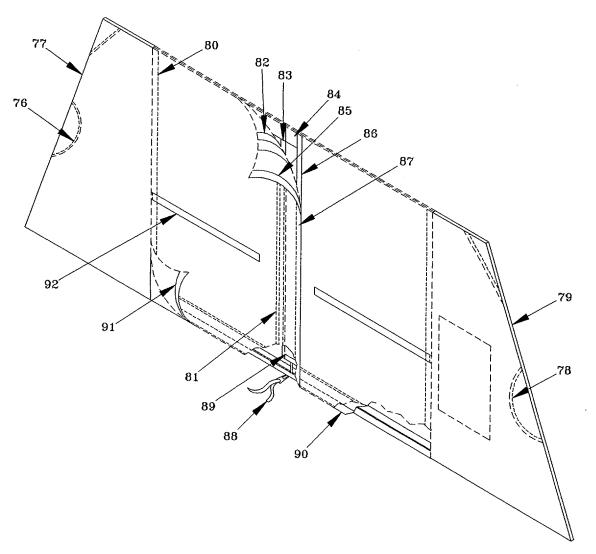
TENT BODY ASSEMBLY (Sheet 8 of 10)
